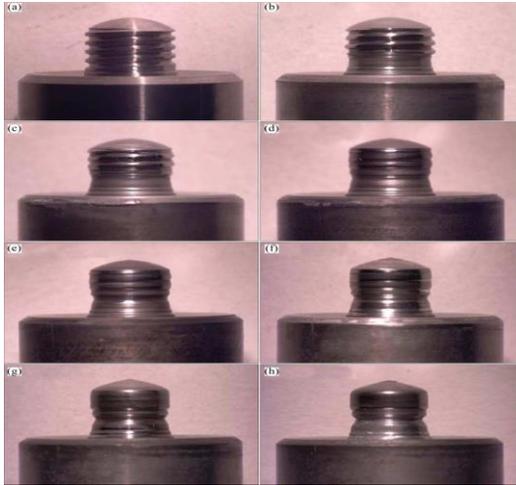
Appearance of threaded tool after each FSW experiment [4]
